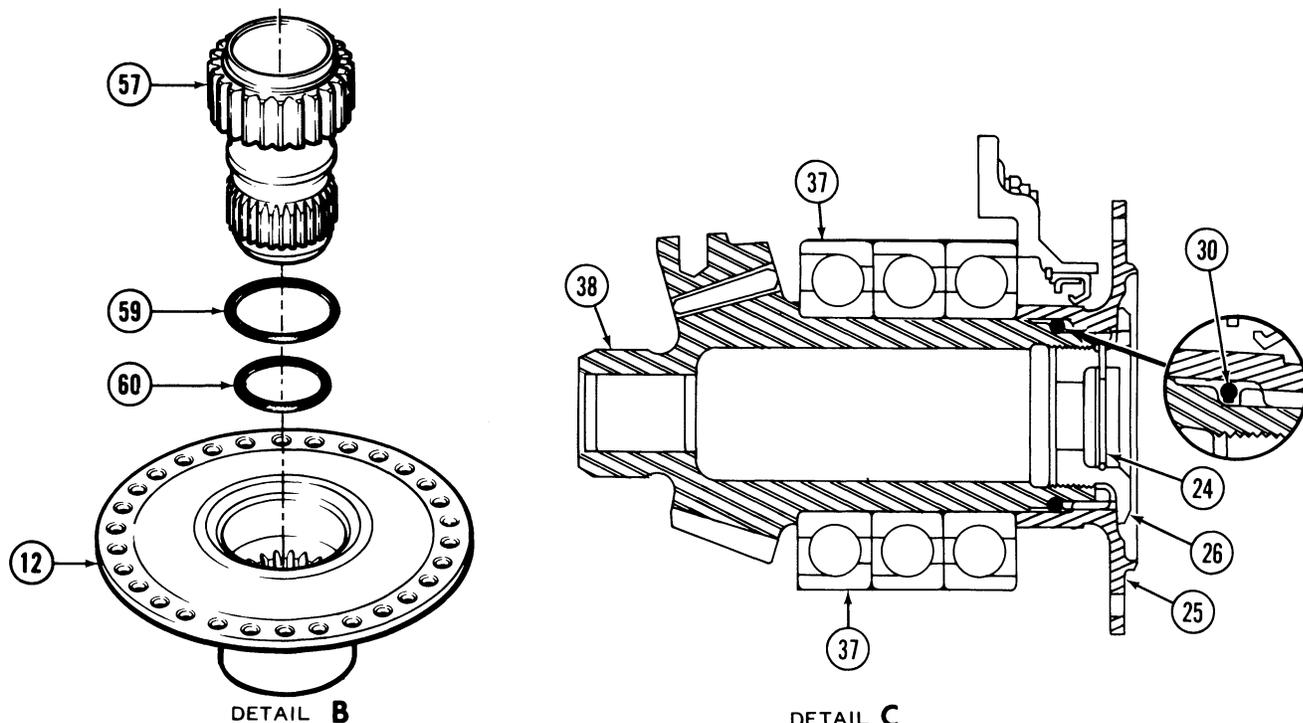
Transmission – Exploded View (Sheet 1 of 2)
